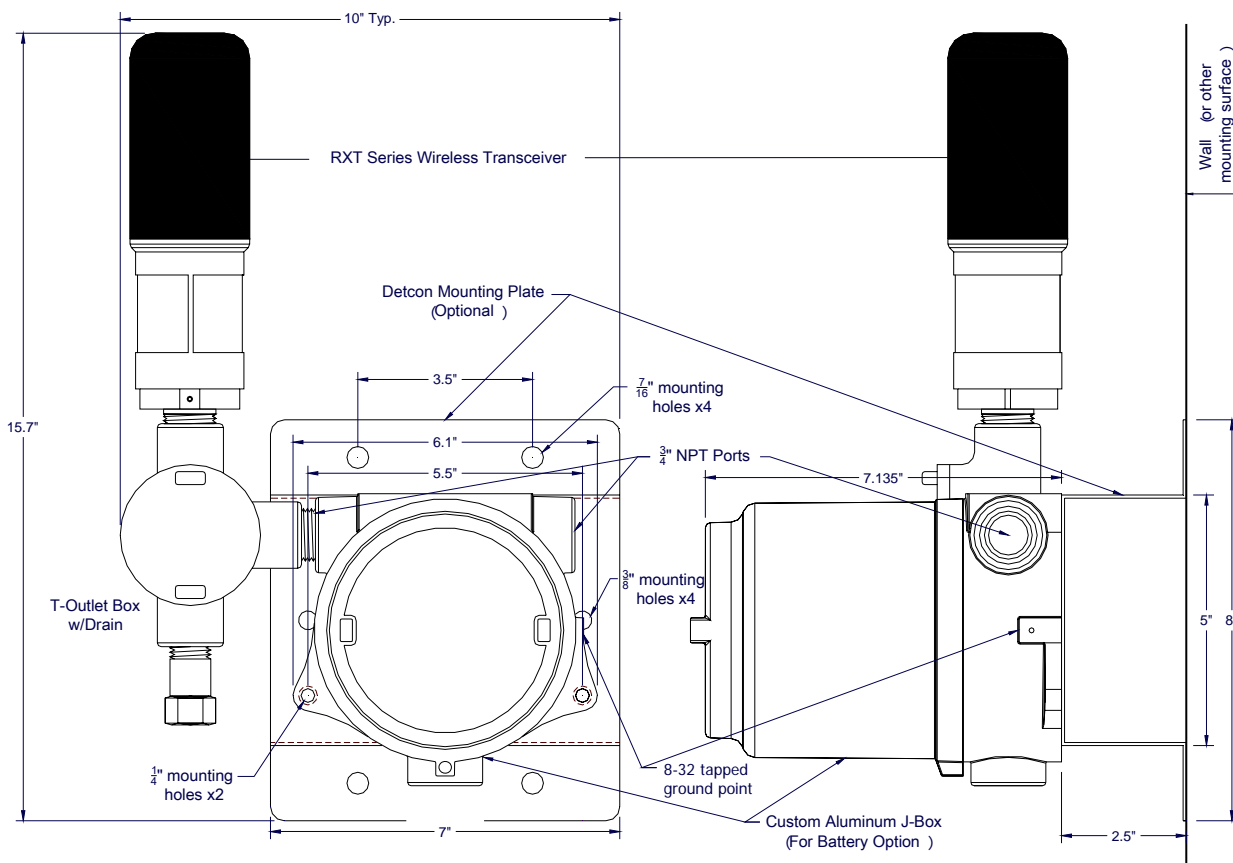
RXT-300 Wireless Transceiver w/Battery Assembly and Mounting Dimensions
